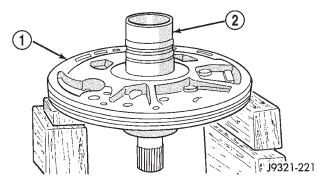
Assembling Reaction Shaft Support And Pump Housing
